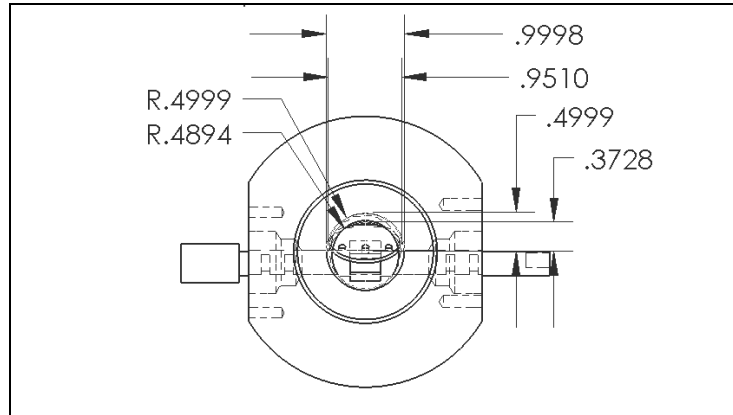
Top view of smart thermostat valve with flow passage geometry
